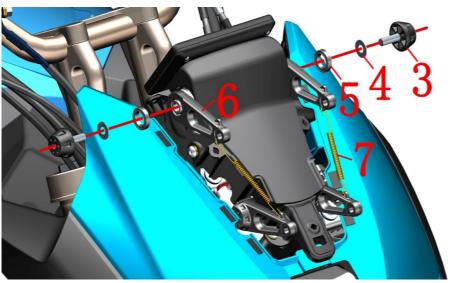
FRONT FORK		Windshield assembly 2	СНК	(0)
